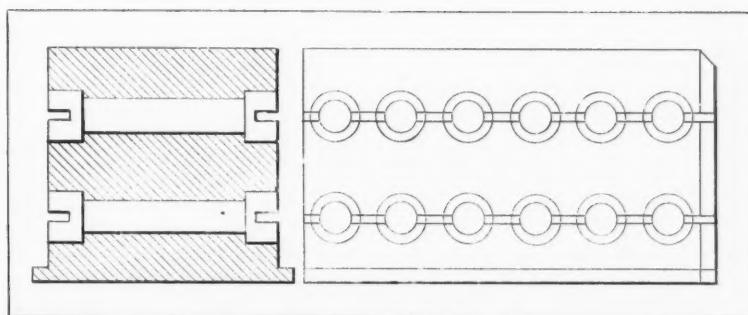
Holder for Screws Slotted in Fixture Shown in Fig. 1
